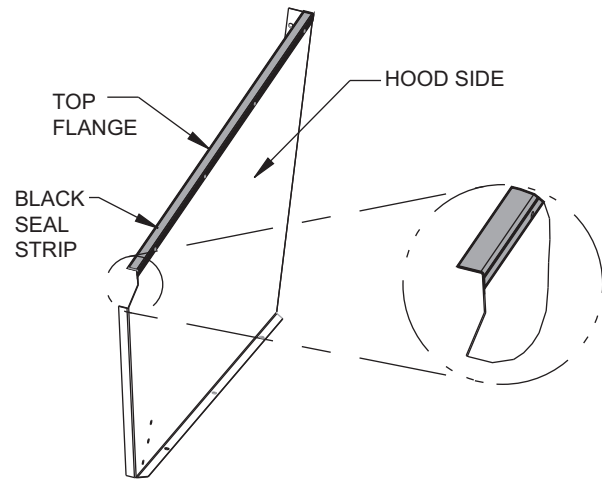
Adding Seal Strip to Top of Hood Sides
